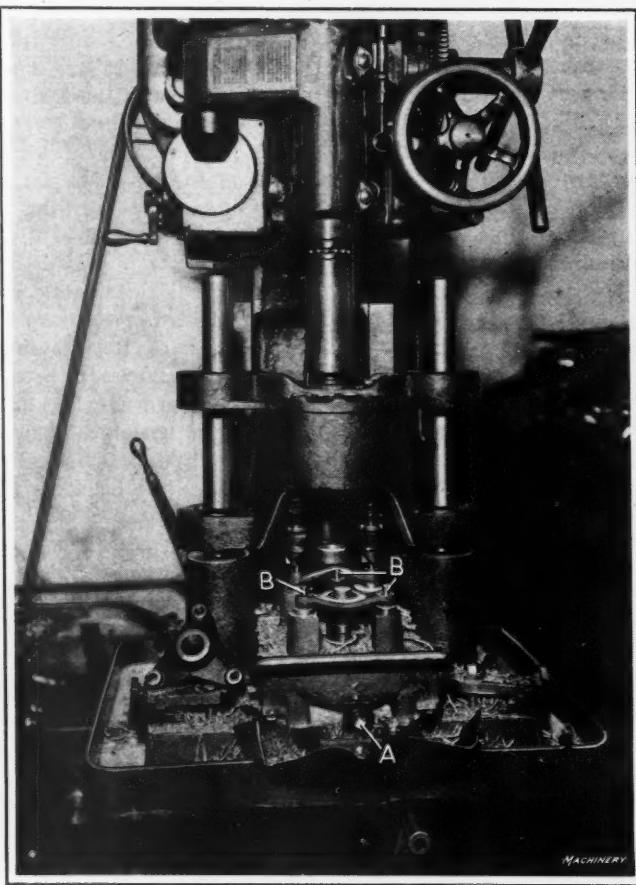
Baker Bros. High-duty Drilling Machine equipped with a Two-station Work-holding Fixture and Special Three-spindle Head for spot-facing
